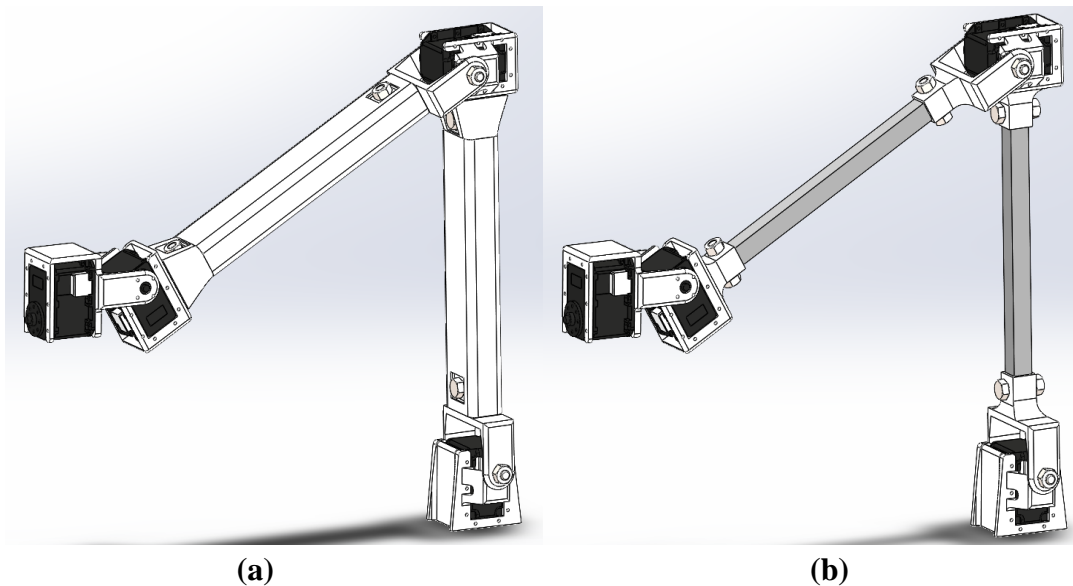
Completed CAD of arm assembly. The link covers are hidden in (b).
